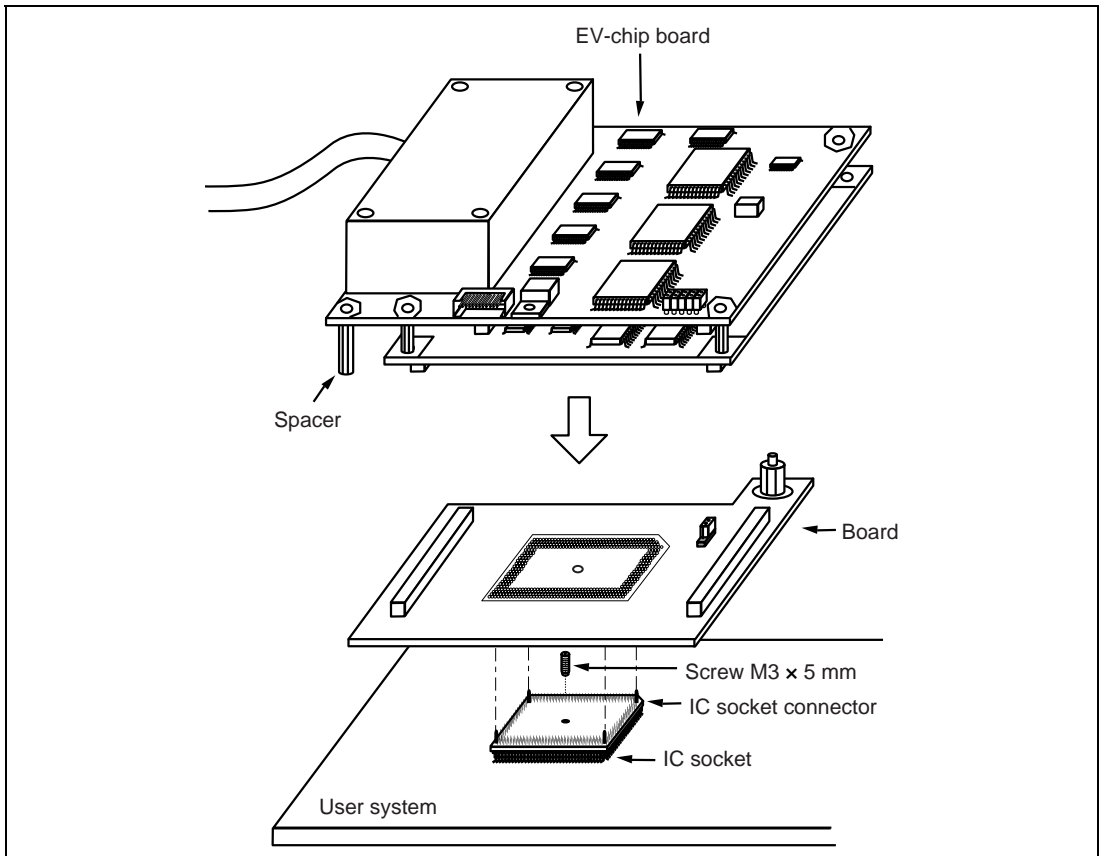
User System Interface Board for the SH7058, SH7058S, SH7059 PRQP0256KB-A Package
